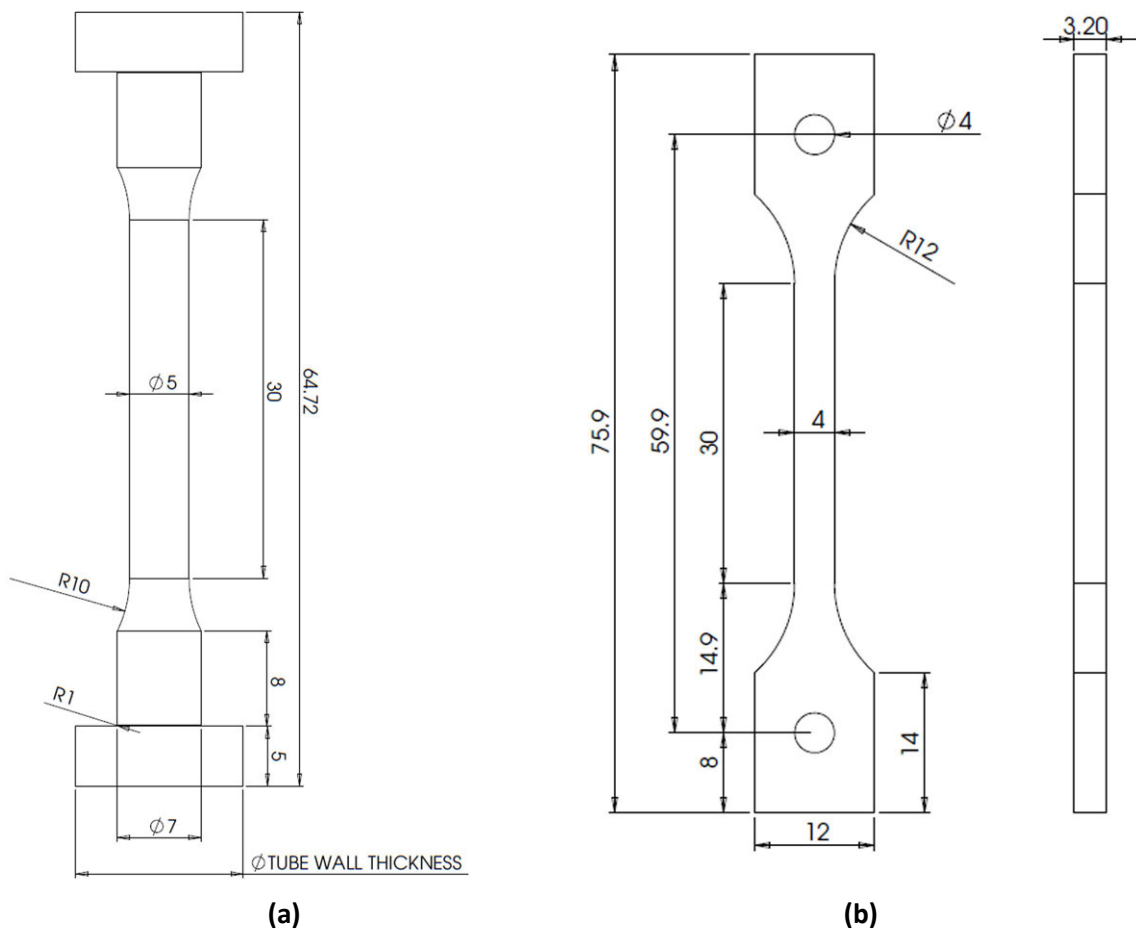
Dimensions of the (a) cylindrical and (b) rectangular creep samples
